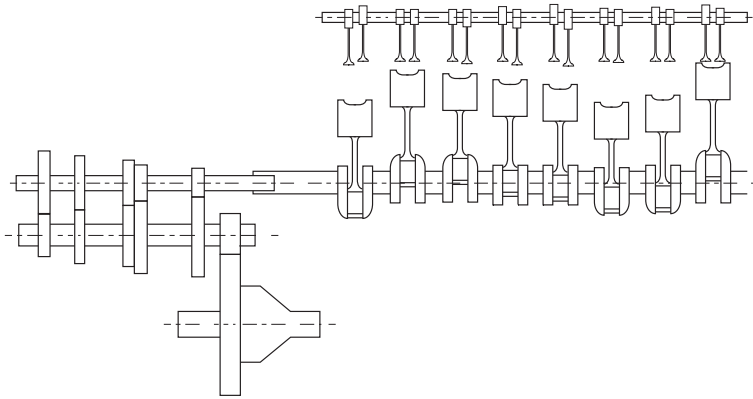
Schematic internal combustion engine, attached to a five speed gearbox, feeding torque to the differential through a final gear.
